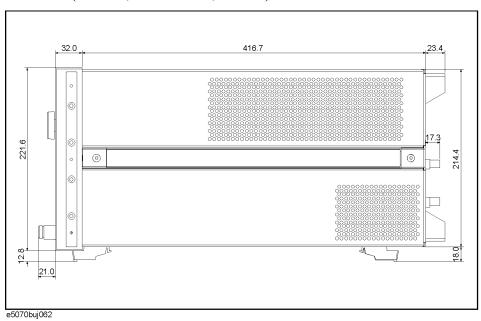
Dimensions (side view, in millimeters, nominal)
